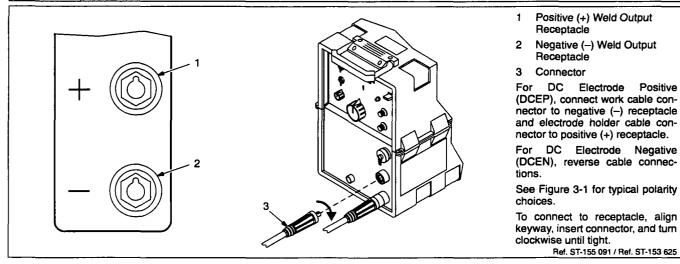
Connecting To Weld Output Receptacles
